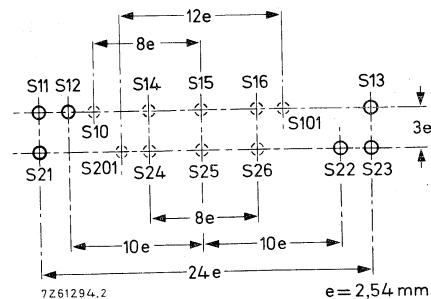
Hole pattern in the printed-wiring board for a tandem potentiometer (viewed on component side).
